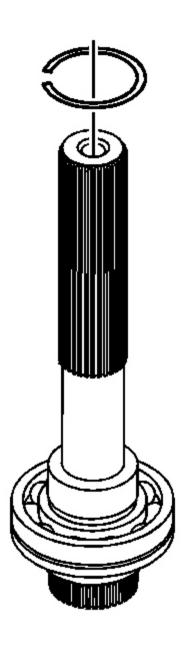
View Of Rear Output Shaft Bearing Retaining Ring Courtesy of GENERAL MOTORS CORP.
